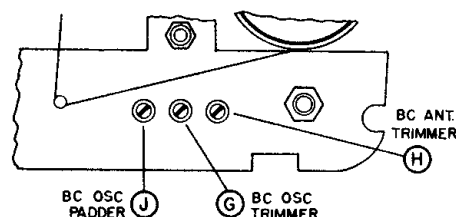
Front View of Chassis Showing Location of Alignment Adjustments
